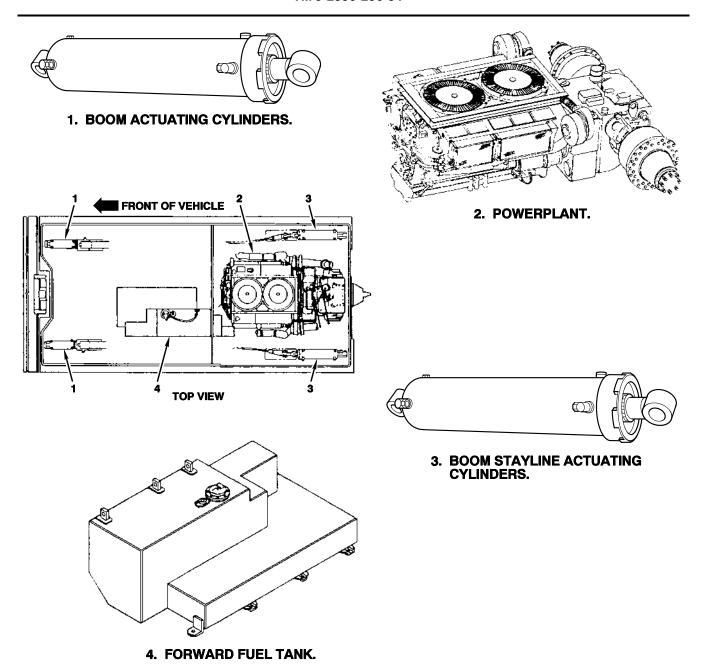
Location of Major Components, Assemblies, and Auxiliaries (Sheet 1 of 8).
